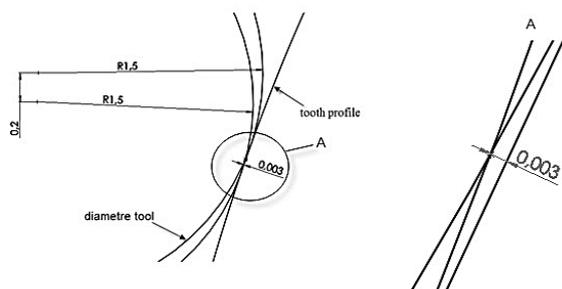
The milling cutter profile during the manufacturing process and its deviation (in millimeters)
